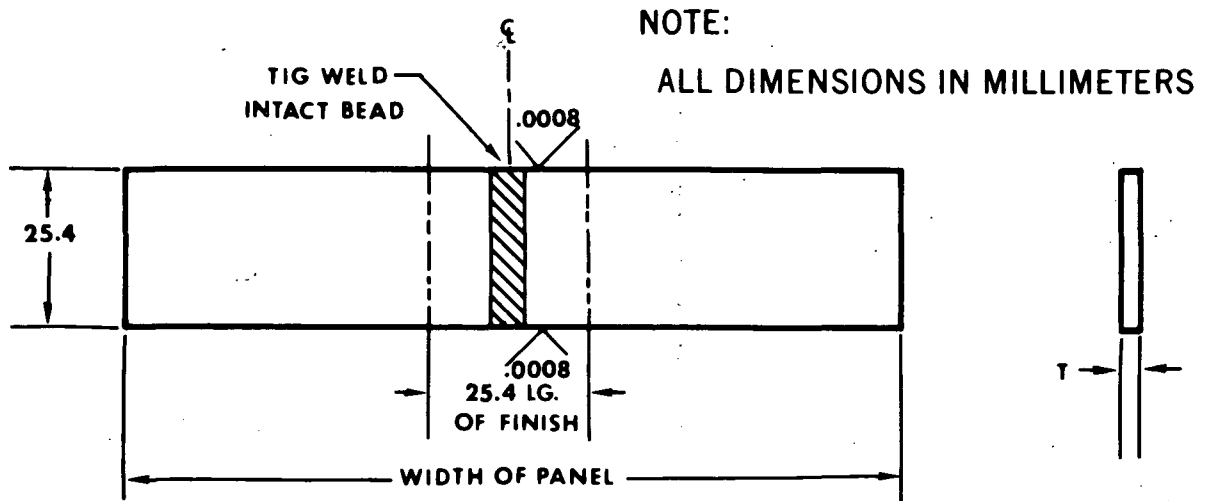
TRANSVERSE WELD TENSILE SPECIMEN FOR AMBIENT TEMPERATURES
